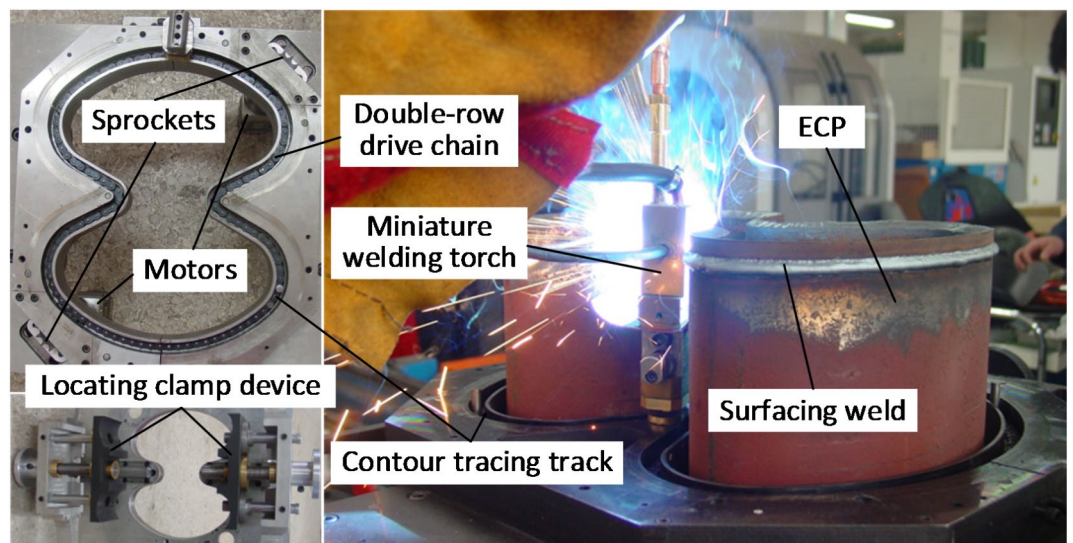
The welding test platform of 8-shaped ECP.
